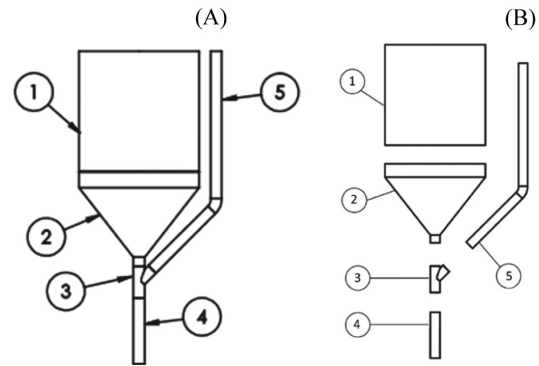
Conceptual design for prototype machine: (A) machine assembly; (B) machine components, where 1 = water tank, 2 = funnel, 3 = Y-junction, 4 = sand collector, 5 = drain outflow tube
